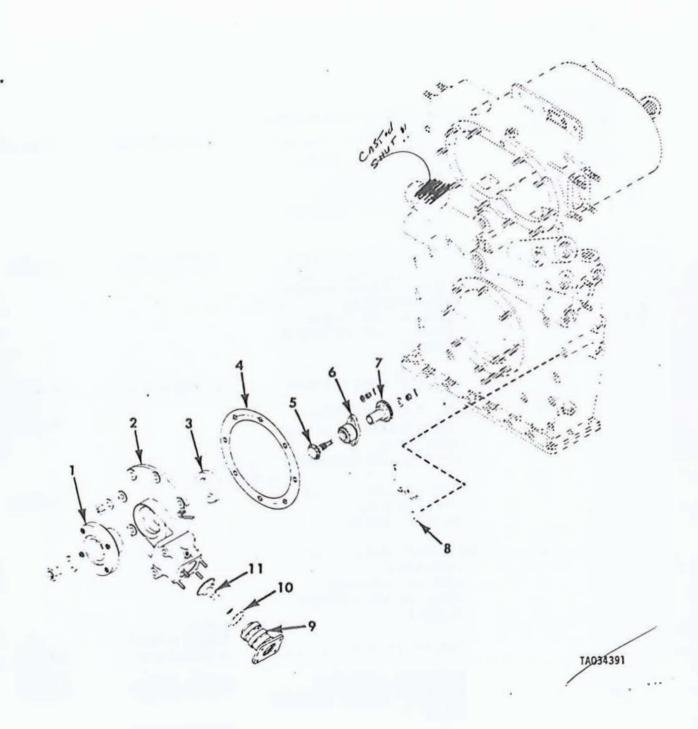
Power take-off drive assembly and fuel pump drive - Model AVDS-1790-2DR.
